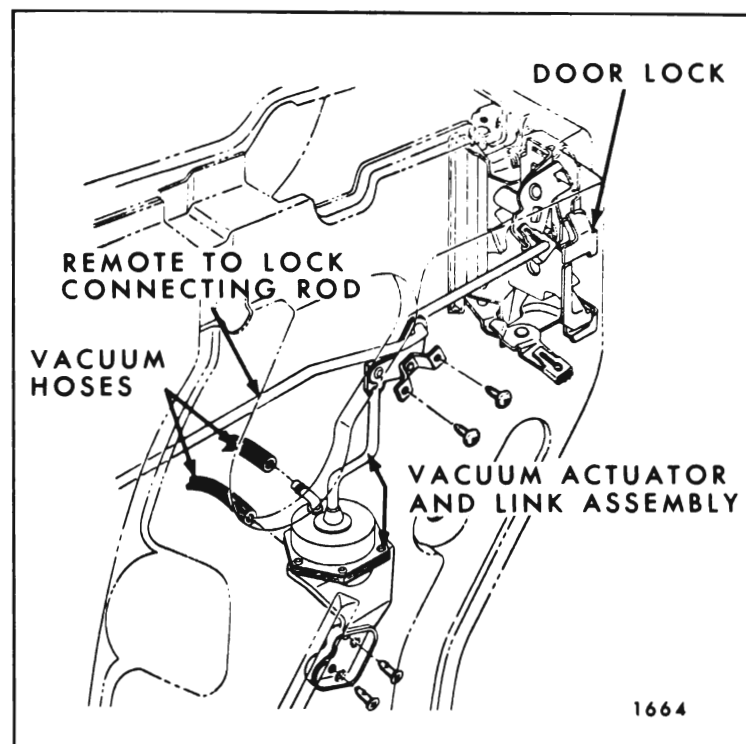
Rear Door Vacuum Lock Actuator and Link Assembly - 68069-68169 Styles
